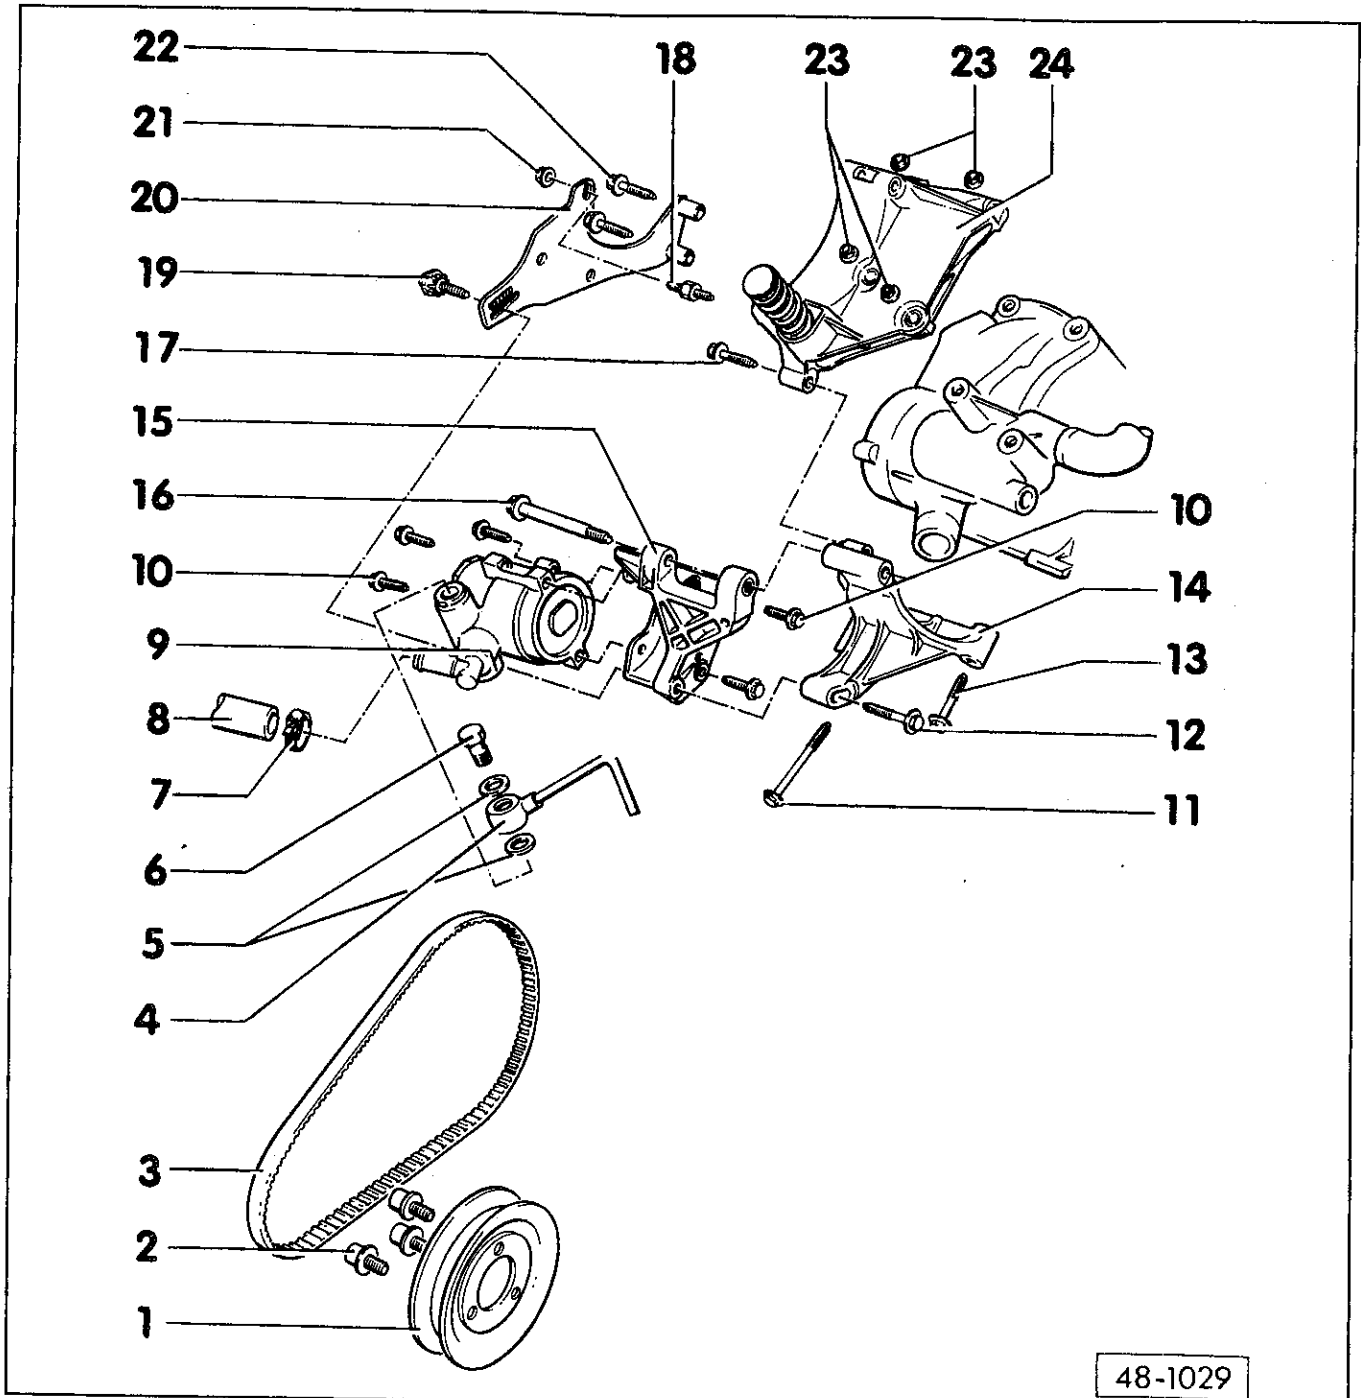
Power steering pump assembly used on cars with 4-cylinder engines.
